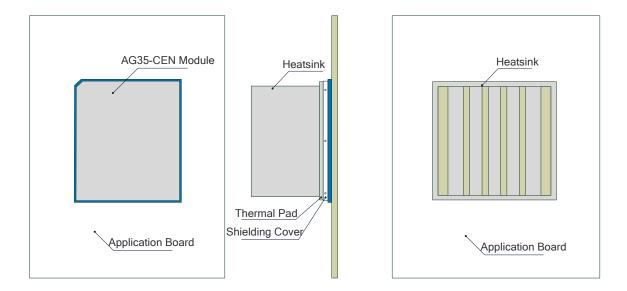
Referenced Heatsink Design (Heatsink at the Top of the Module)
